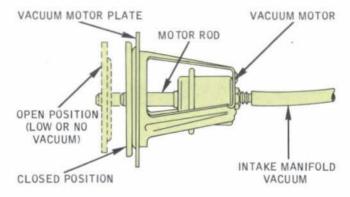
390 GT V-8 Air Valve and Vacuum Motor Assembly
